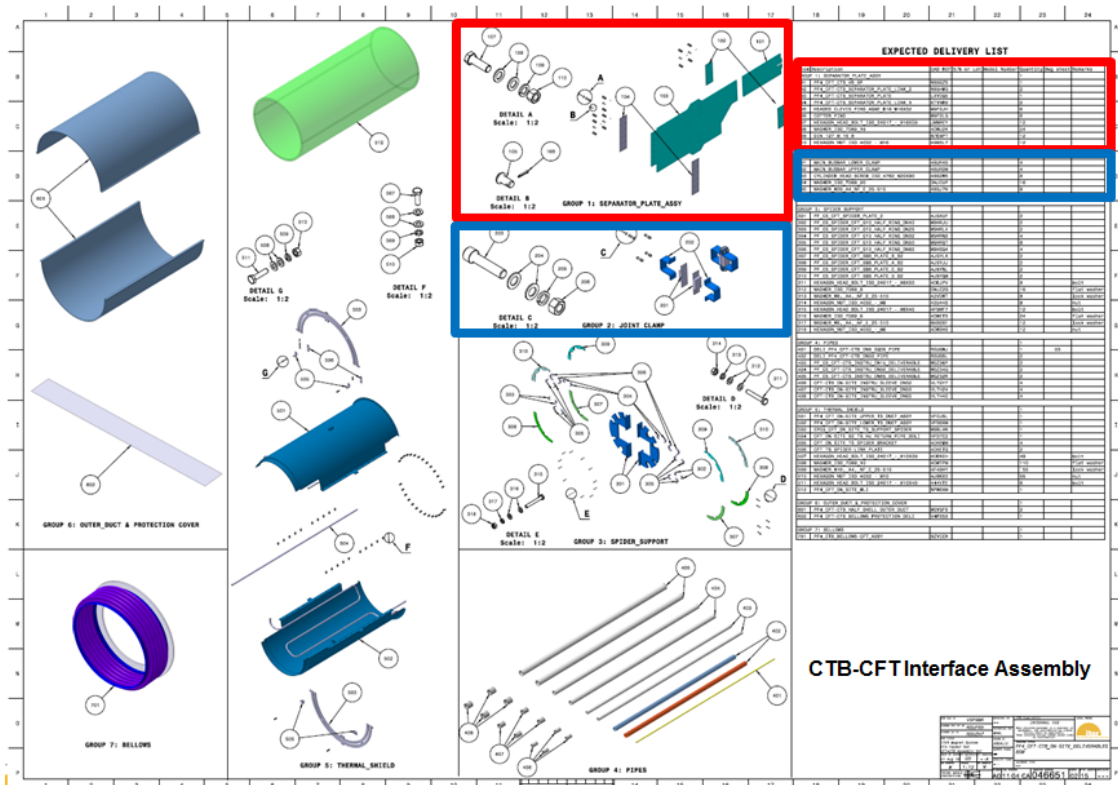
Example of Kitting for Magnet Feeder CTB-CFT Interface Assembly
